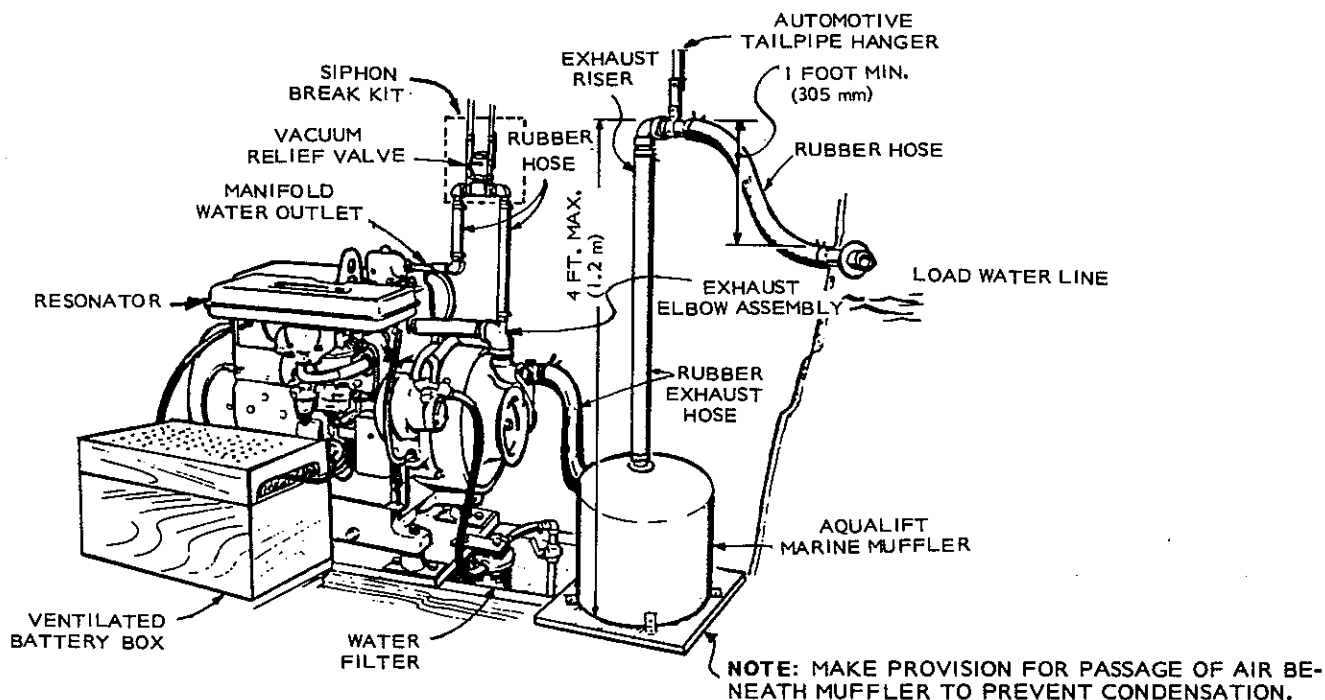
BELOW-WATER-LINE INSTALLATION OF MAJ ELECTRIC PLANT
